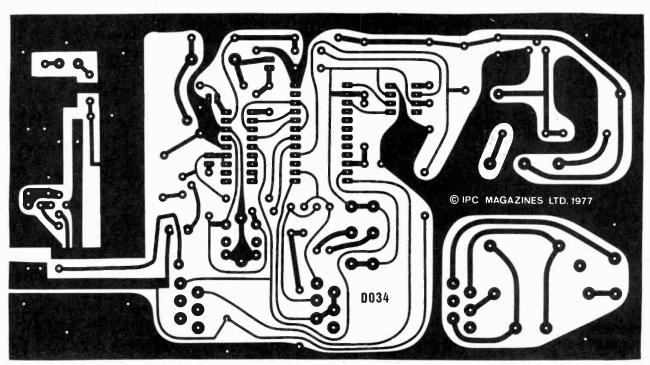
Track detail of p.c.b. The board is available from Readers' PCB Services Ltd.
